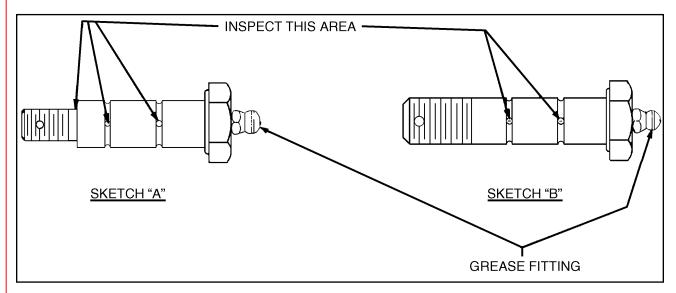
Main Landing Gear Torque Link Greaser Bolt Inspection
